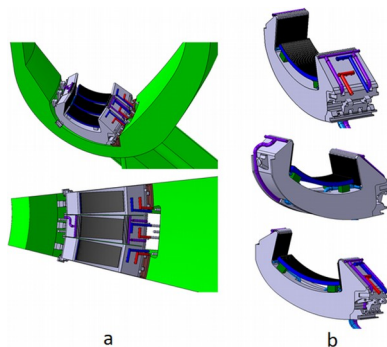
DEMO divertor assembly. a) For each DEMO lower port 3 divertor cassette will be insert in the machine; b) 3d view of divertor Central cassette
